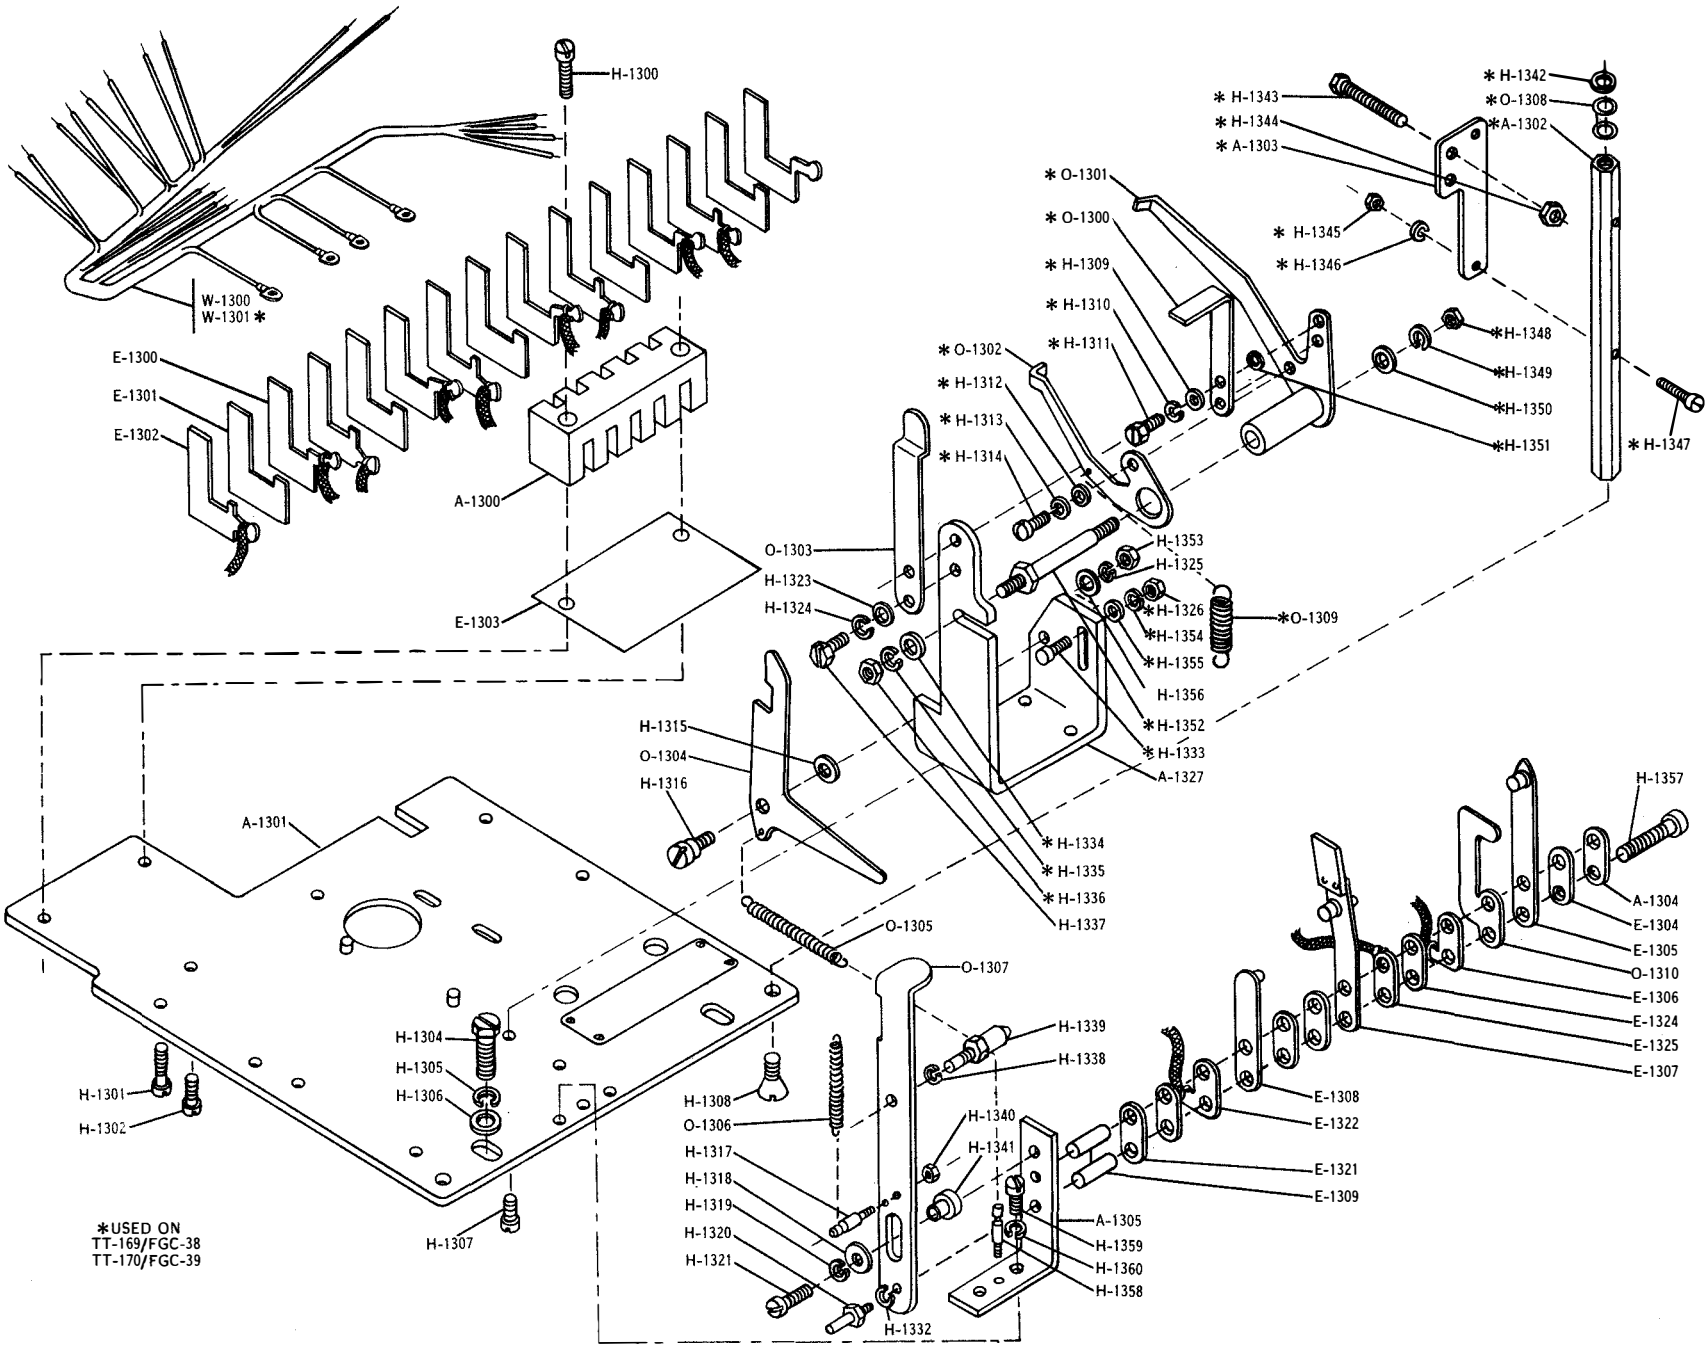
Tape Feed-out Magnets and Worm Follower Assembly
